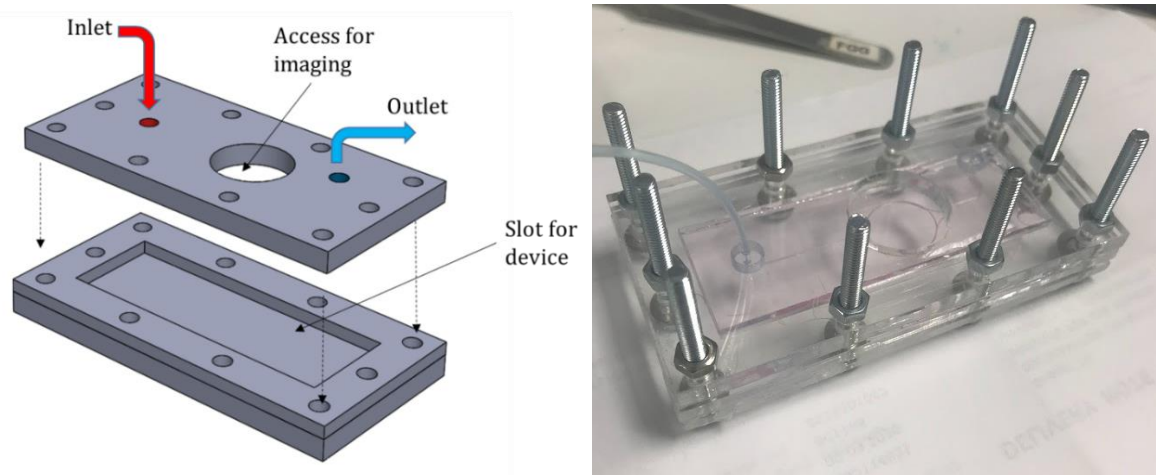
Explosion view of the platform holding the tissue chamber. The holes surrounding the slot for the device are for the nuts and bolts that will be tightened to seal the device. (Device holder v1)
